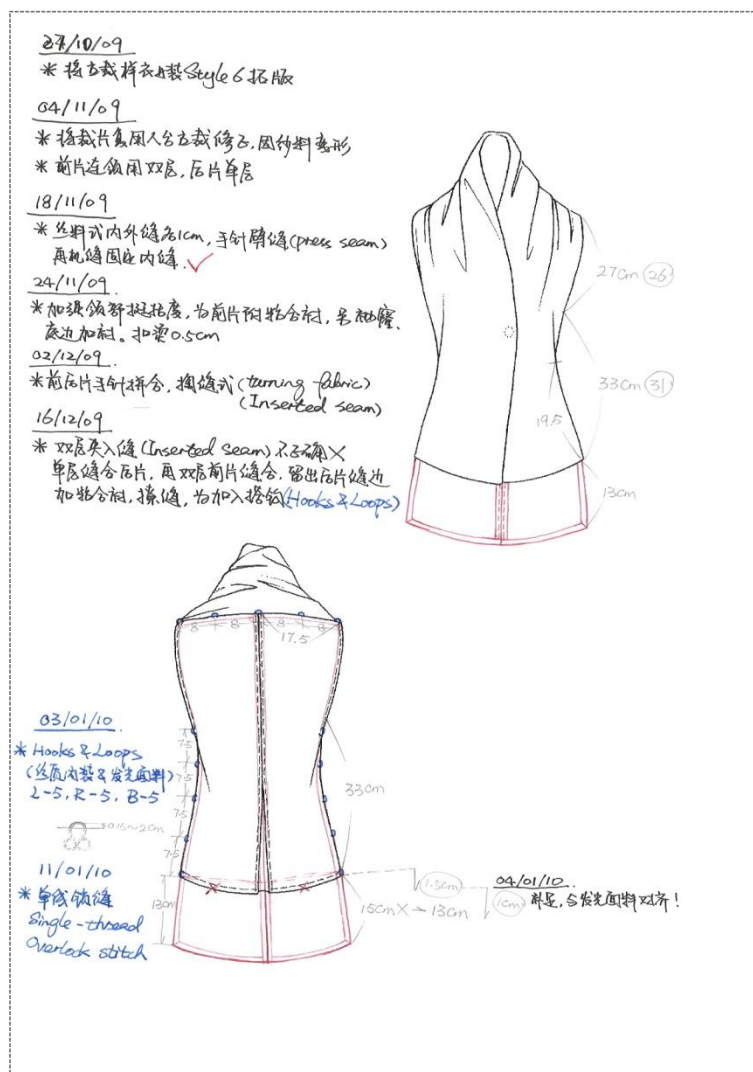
Illustrations and making up details of the chiffon fabric layer for the lady's innerwear garment
